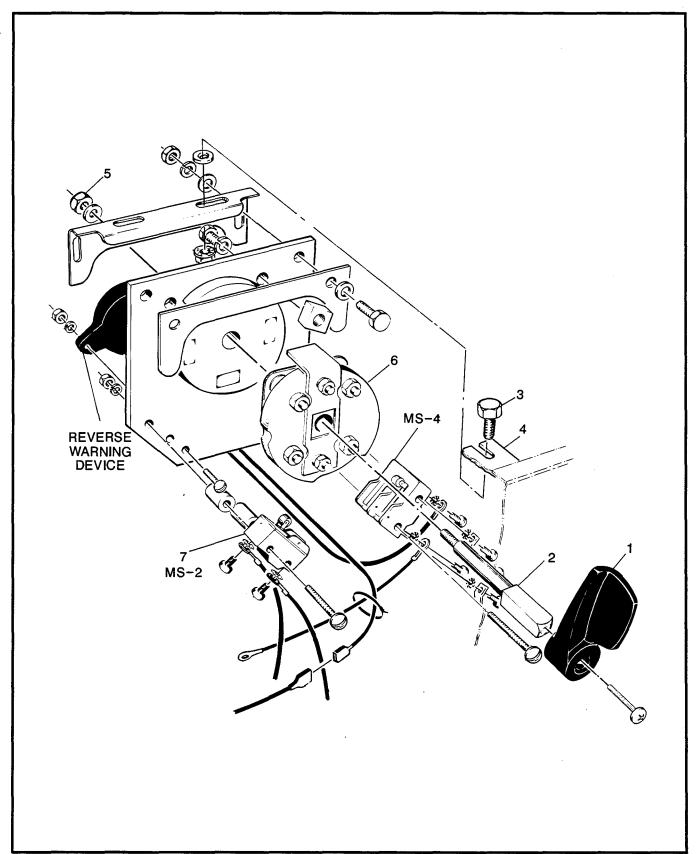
FORWARD-NEUTRAL-REVERSE SWITCH ASSEMBLY
